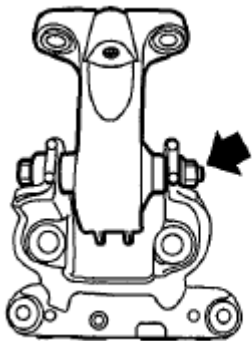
Locating Front Mounting Cushion Rubber Bolt
